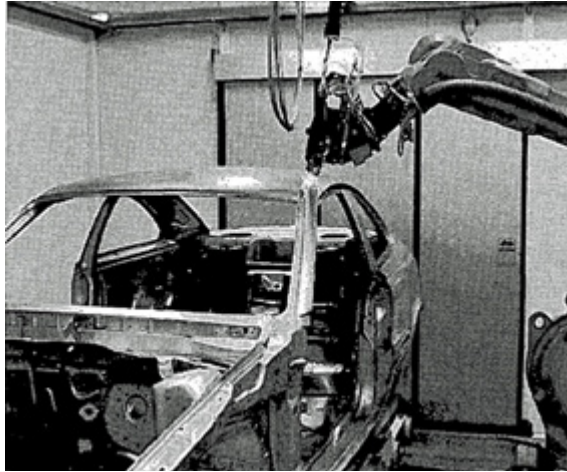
Laser welding of roof, Volvo(1996) ¹⁰⁾.
